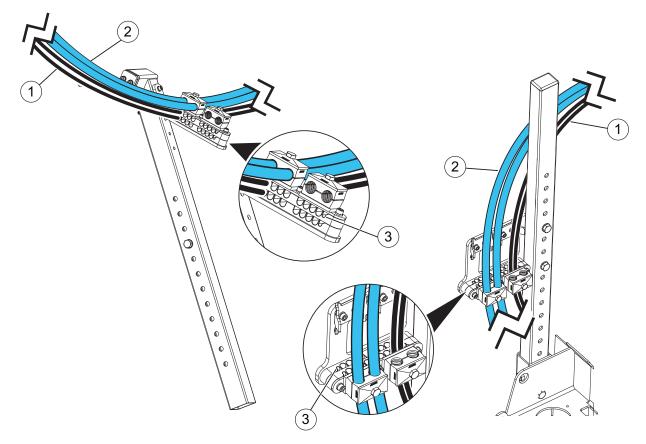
Lamp Cables and Hydraulic Hoses Routing
